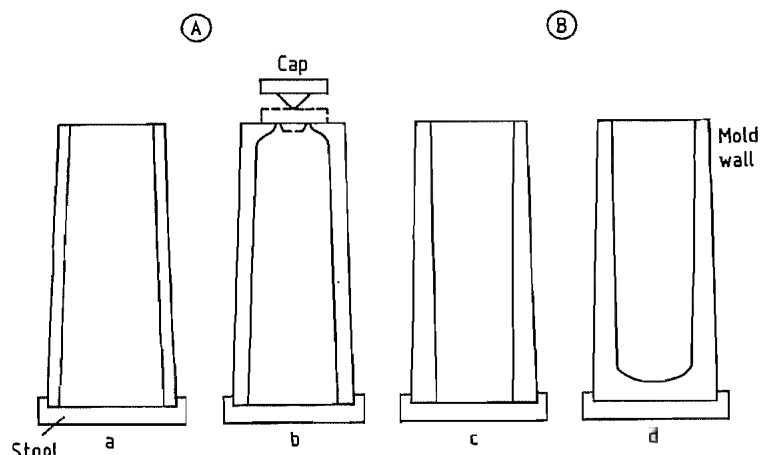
Cross sections (not to scale) of the principal types of ingot mold [91]. A) Big-end-down-molds: open top (a) and bottle top (b); B) Big-end-up-molds: open top (c) and closed top (d).
